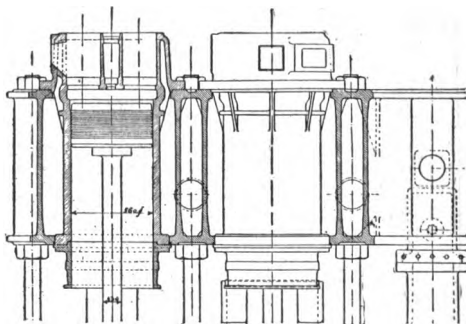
Section Through Cylinder of a Werkspoor Engine.
